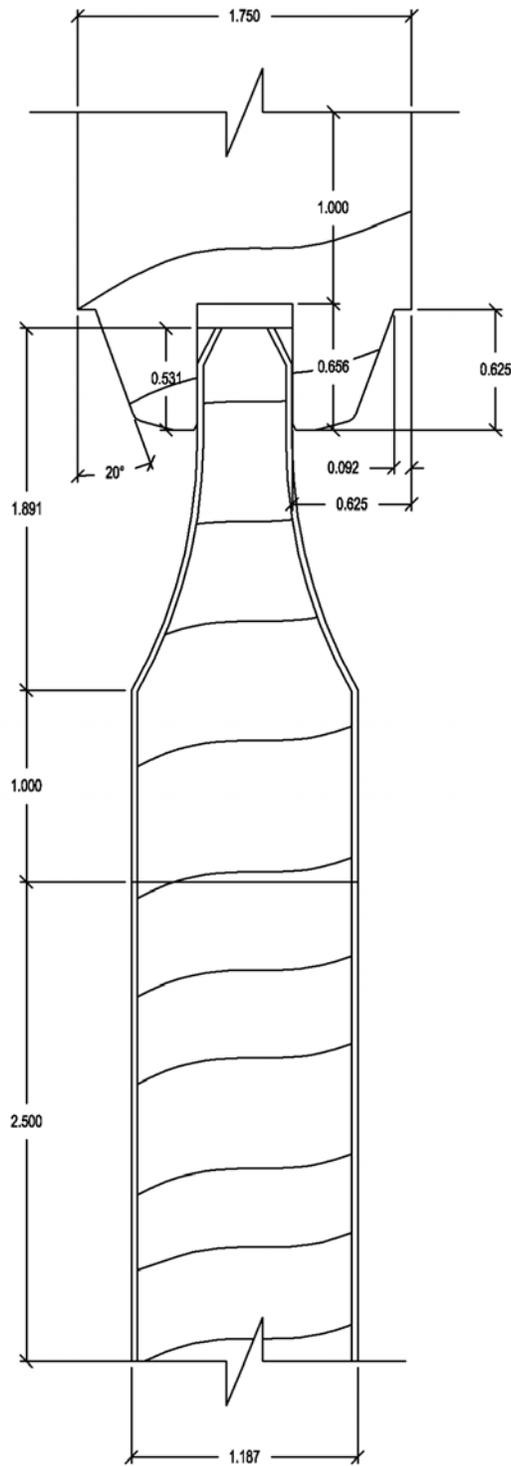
Dimensioned drawing for the panel edge cross section.
